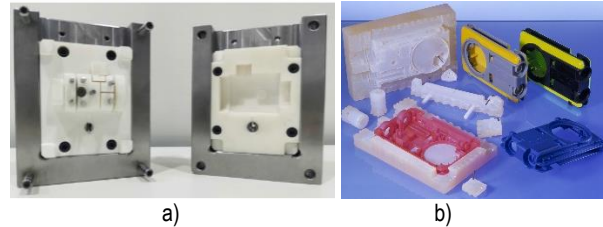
Direct (a) and indirect (b) soft tooling; a) SLA molding inserts; b) silicon molds; [5], [6]
